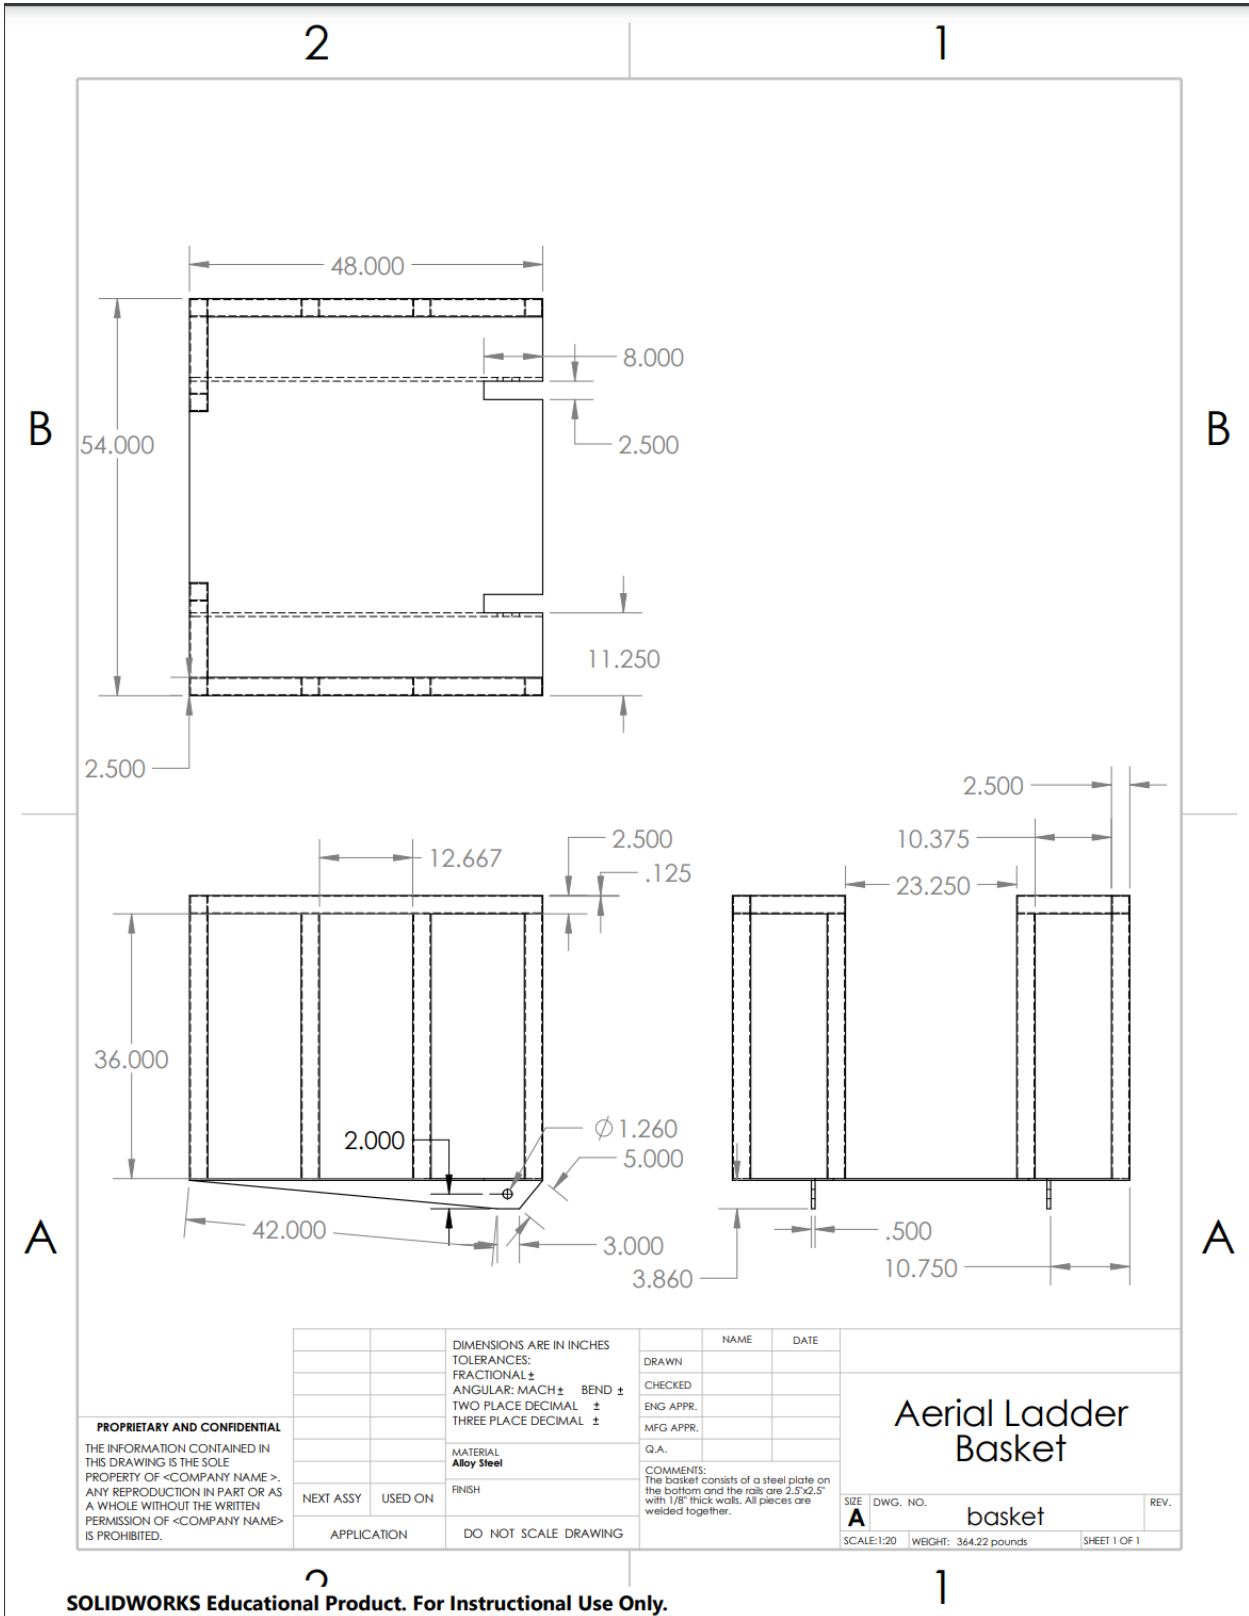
Dimensioned Drawing Aerial Ladder Basket
